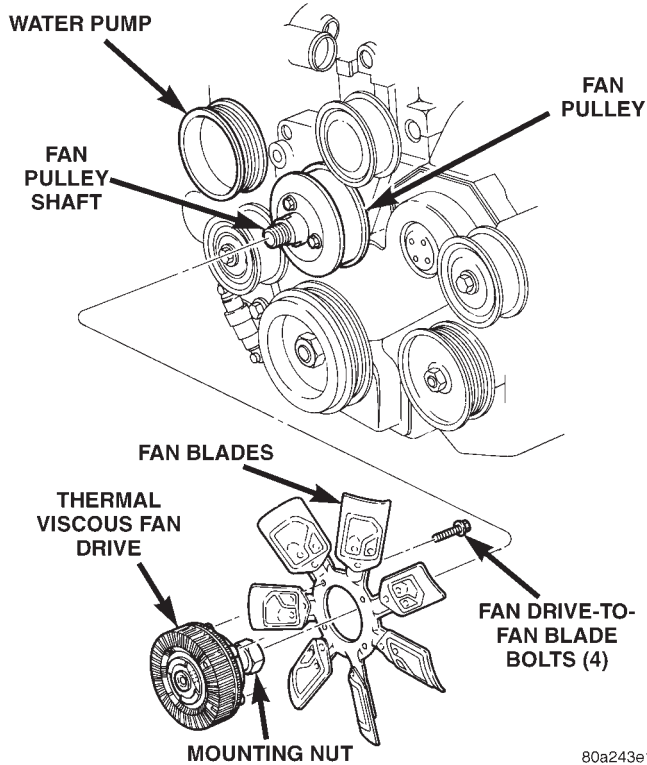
Thermal Viscous Fan Drive and Blade Assembly
